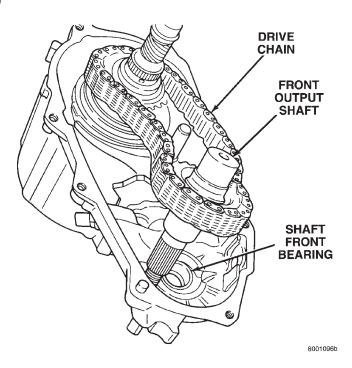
Disengaging Front Output Shaft From Front Bearing
